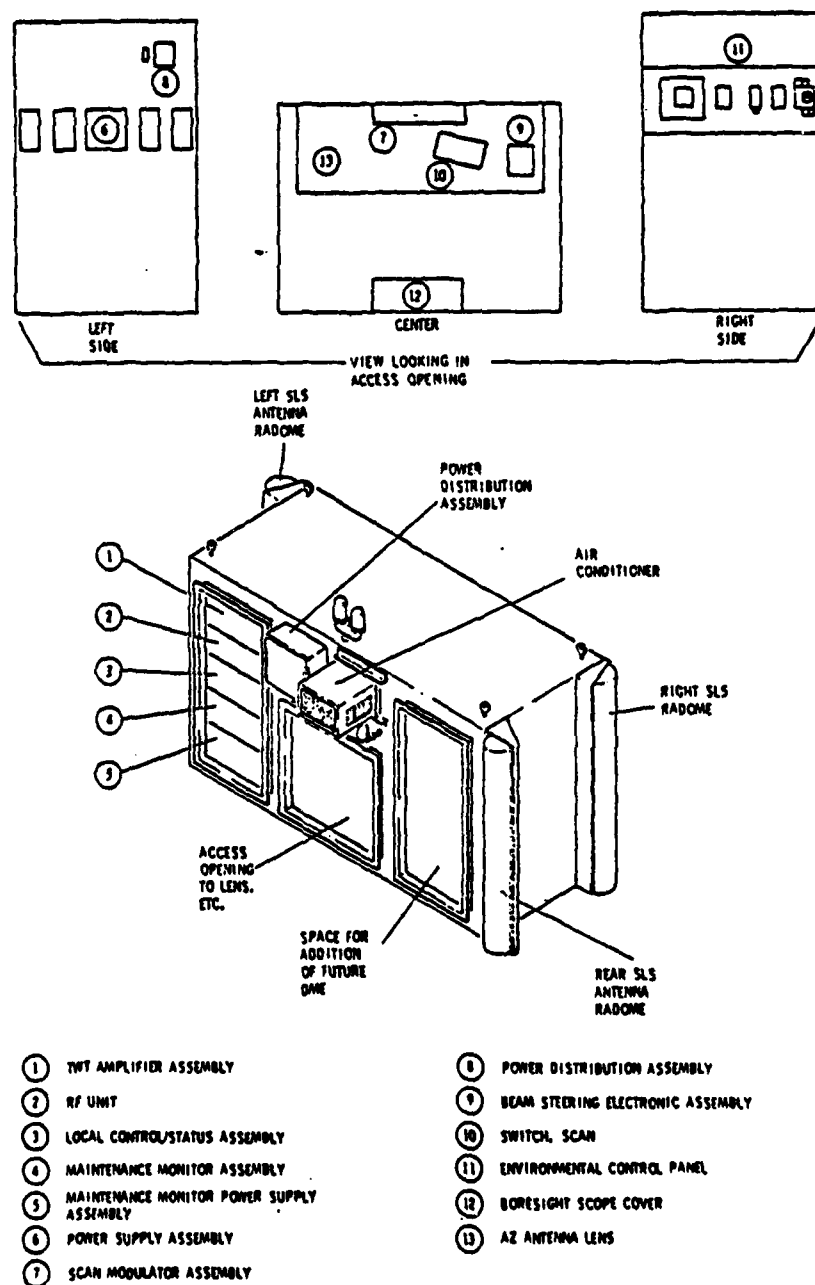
SMALL COMMUNITY AZ EQUIPMENT ENCLOSURE, REAR VIEW
